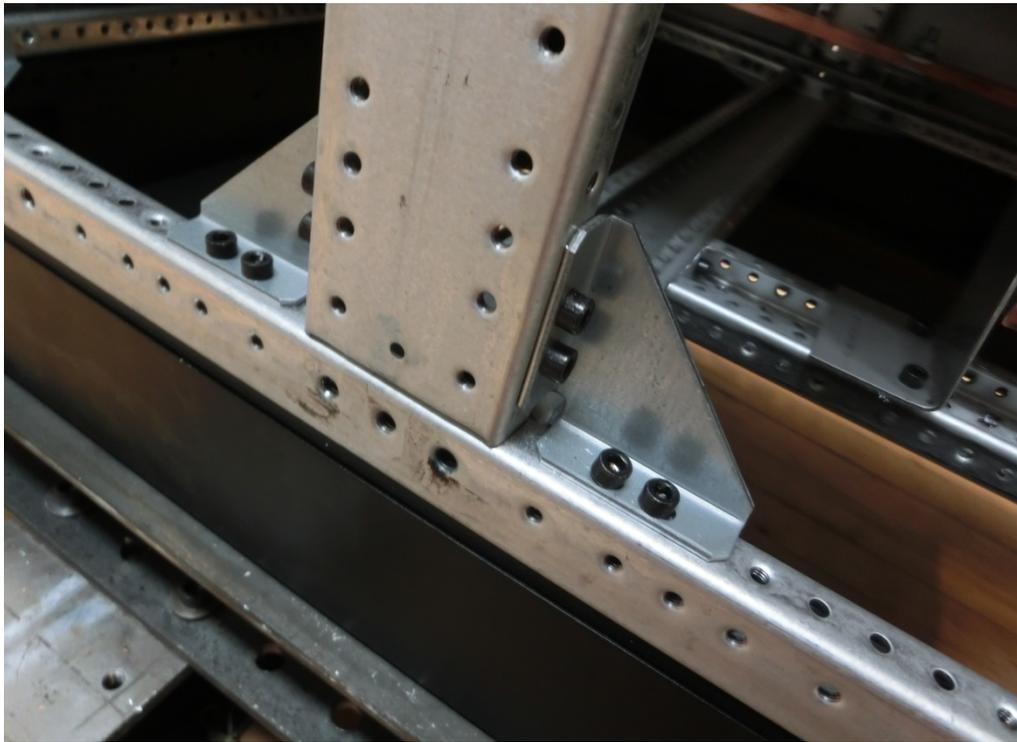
Visual Inspection: “Earthquake brackets” OK.
